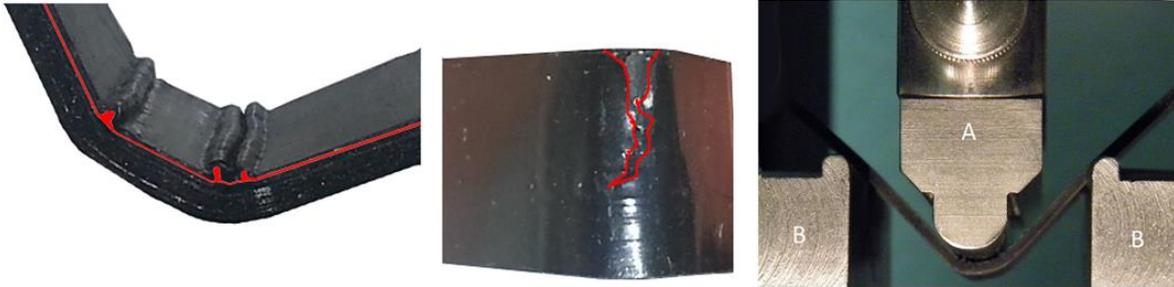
Failure of 3-PT-Bending specimen (single ply delamination (l.), tensile failure (c.)) and the test set-up (r.)
